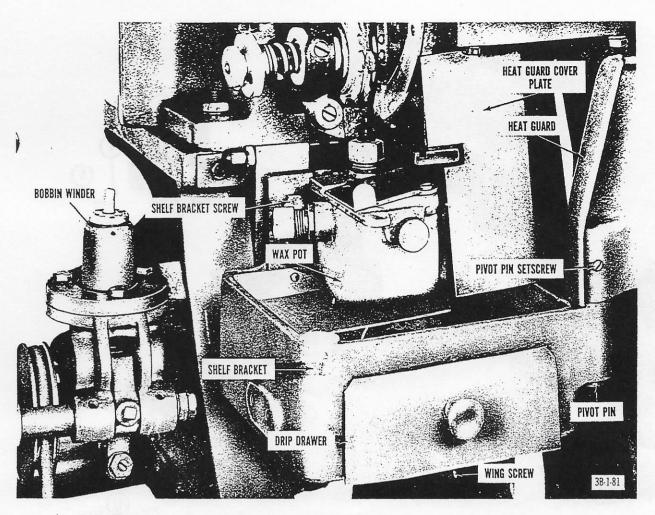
Wax pot assembly installed with shelf bracket and heat guard.
